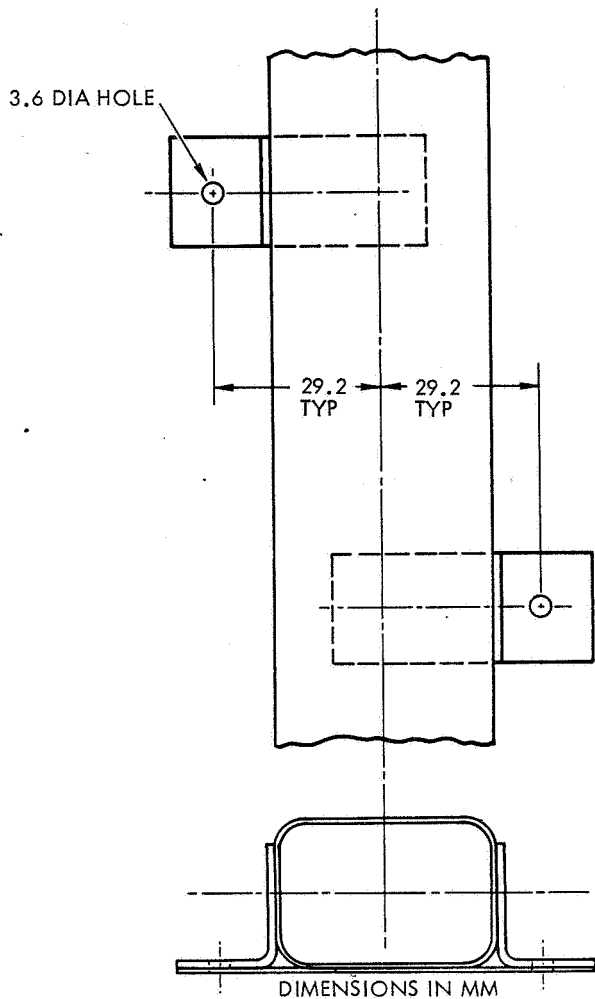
Frame Cross-Section and Substrate Attachment Design
